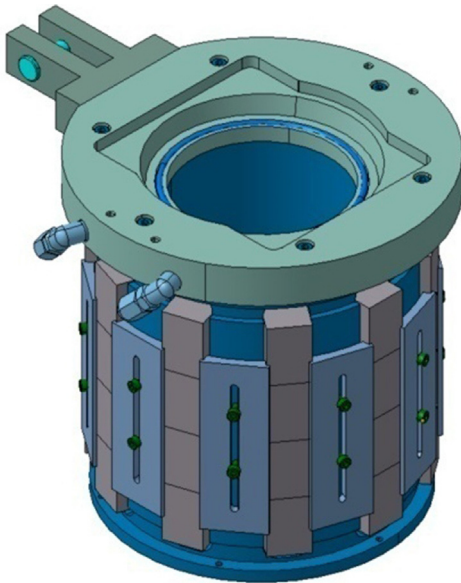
Schematic view of Cyclone30 ion source magnetic confinement assembly.
